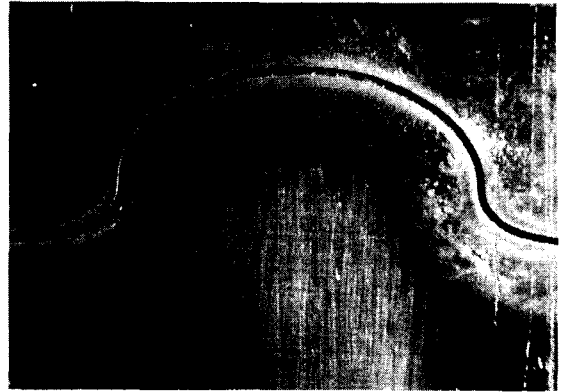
Picture of machined workpiece by prototype Wire-EDM system
